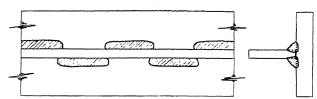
Staggered Intermittent Fillet Welds
